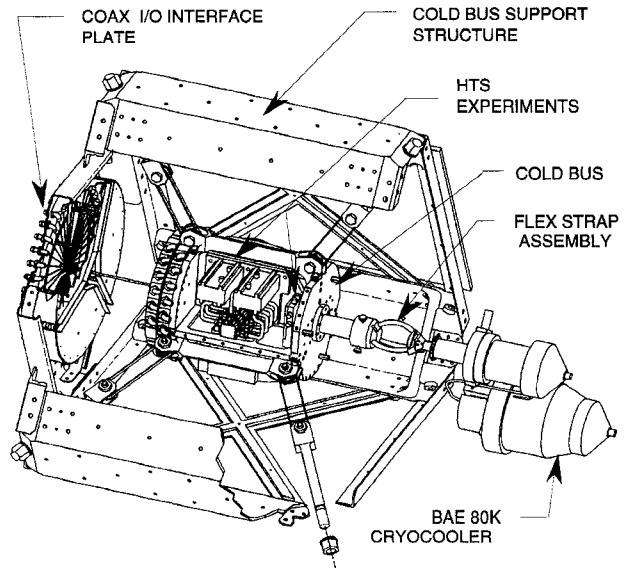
Cutaway drawing of HTSSE-II cold bus and support structure.
